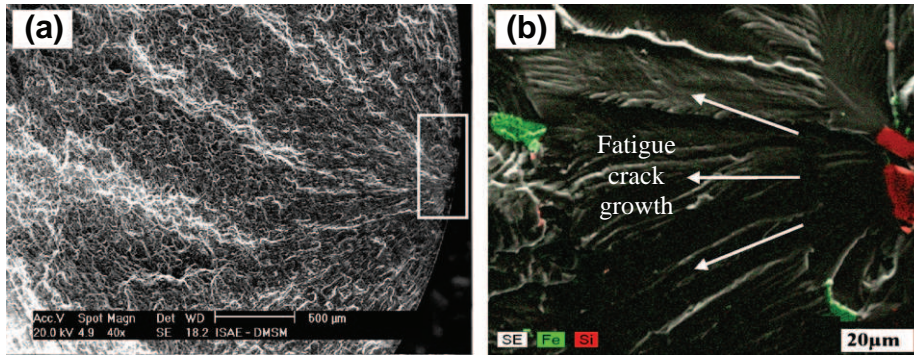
(a) SEM image for machined specimen at low magnification showing crack initiation site and (b) EDS analysis of (a) showing cracking of Mg_2Si particle and subsequent crack growth.
